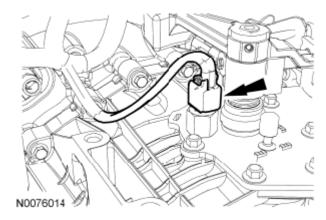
Locating Reversing Lamp Switch Electrical Connector Courtesy of FORD MOTOR CO.
